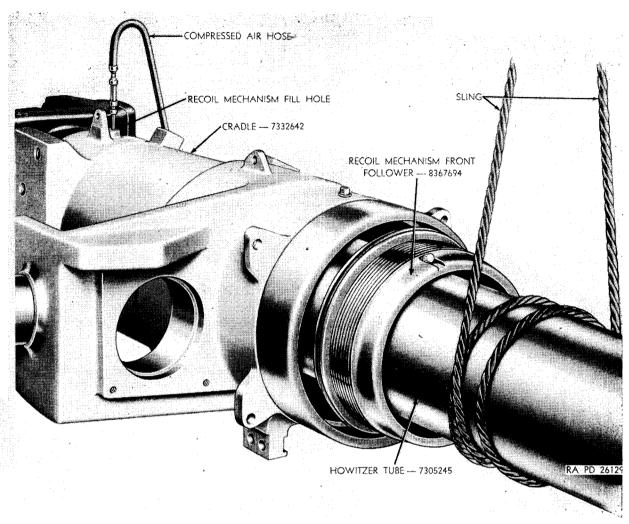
Mount M85—blowing out recoil mechanism front follower, using compressed air.
